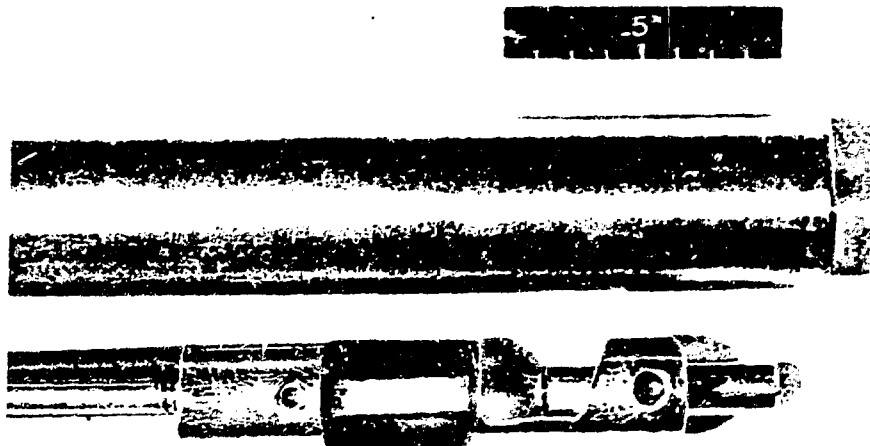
Modular Ultrasonic Probe Being Studied for Inspection of Tube-to-Tubesheet Joints for Steam Generators.
